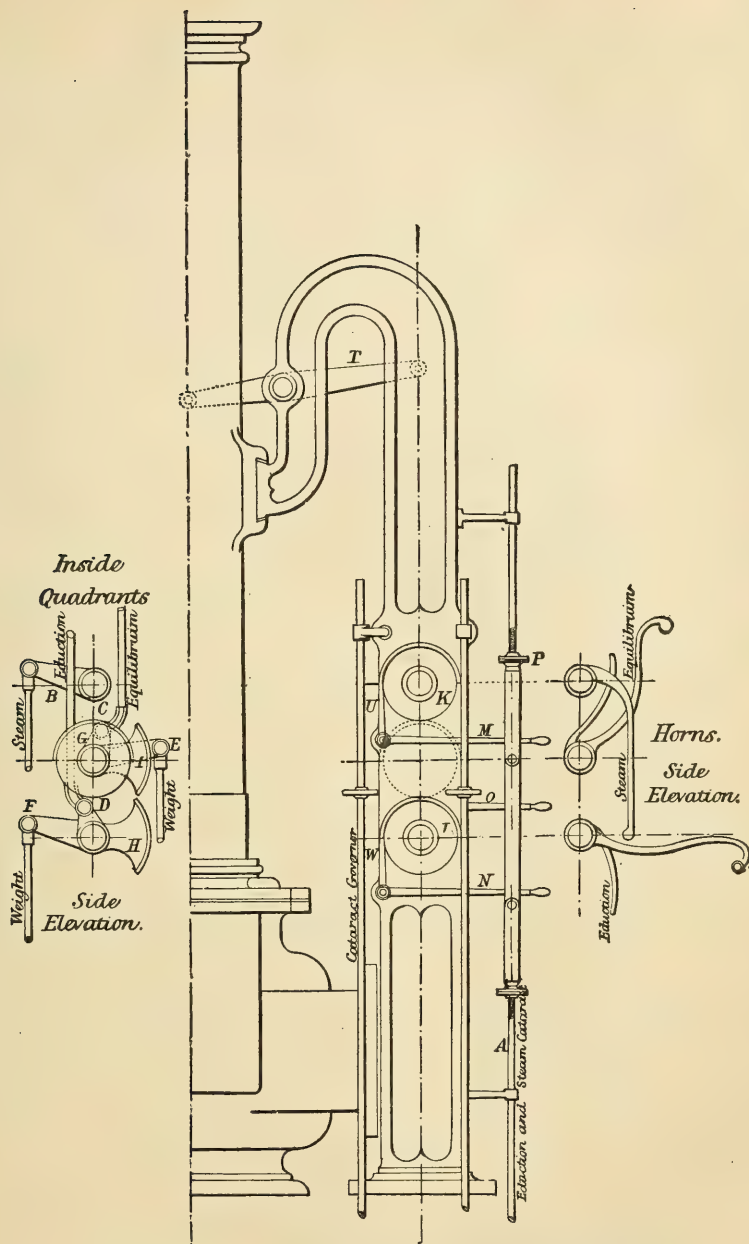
Valve Gear of a 90-inch Cornish Pumping Engine.—Side Elevation.
